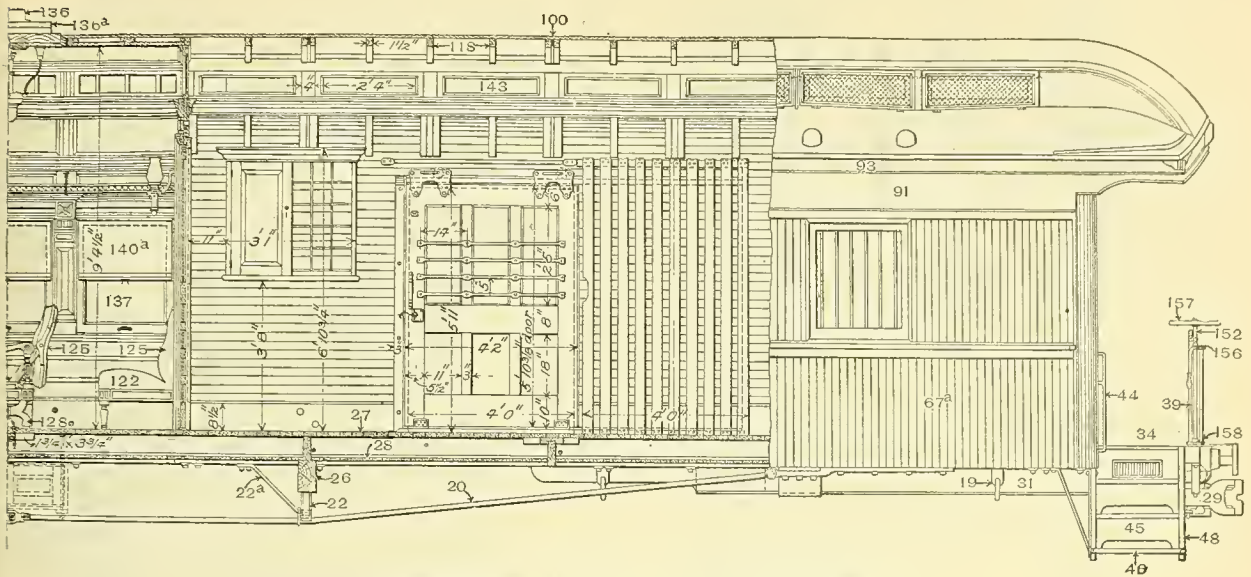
Sectional Side Elevation, Baggage Compartment.
